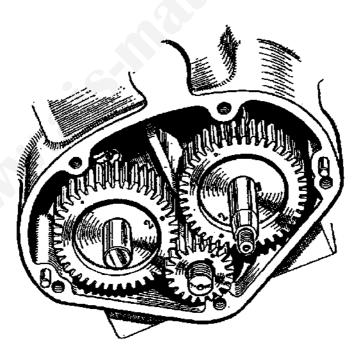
VALVE-TIMING MARKINGS FOR 1949-51 ENGINES.
